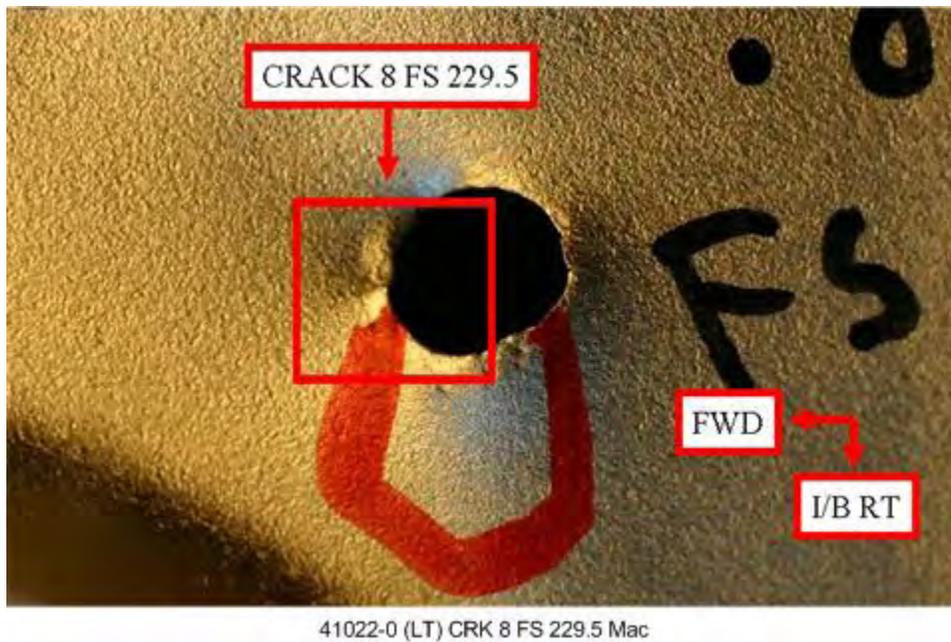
Macroscopic View of Crack 8 on the Left Inboard Floorboard Support Assembly FS 229.5
